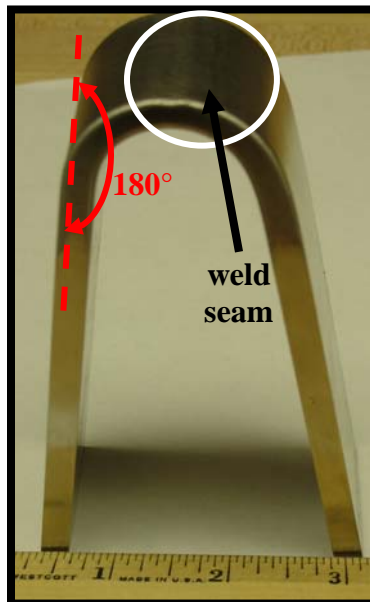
Post bend test sample. Multiple 180° bend tests were performed in accordance with and qualified per Reference [81] on welded samples of the Grade 2 Inconel. Both sides of the weld saw strain by bending different samples in each of the two directions.
